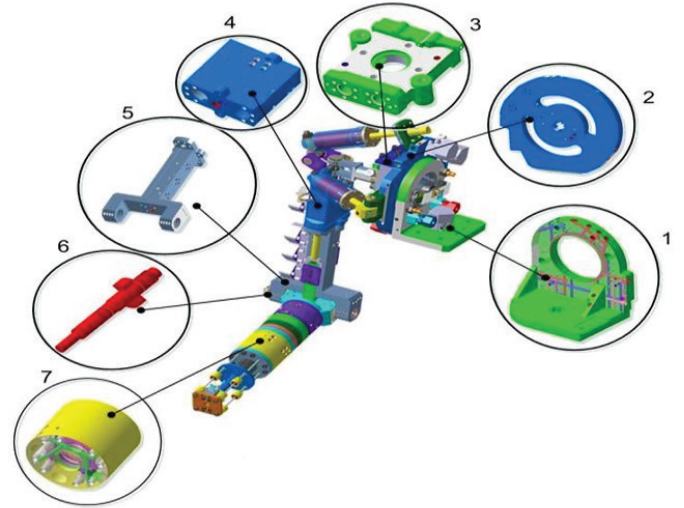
Exploded view of the HYDROiD robotic arm illustrating the hydraulic integrated components: (1) Shoulder upper part, (2) Shoulder middle part, (3) Shoulder lower part, (4) Elbow upper part, (5) Elbow lower part, (6) Elbow axis of rotation, and (7) Wrist part.
